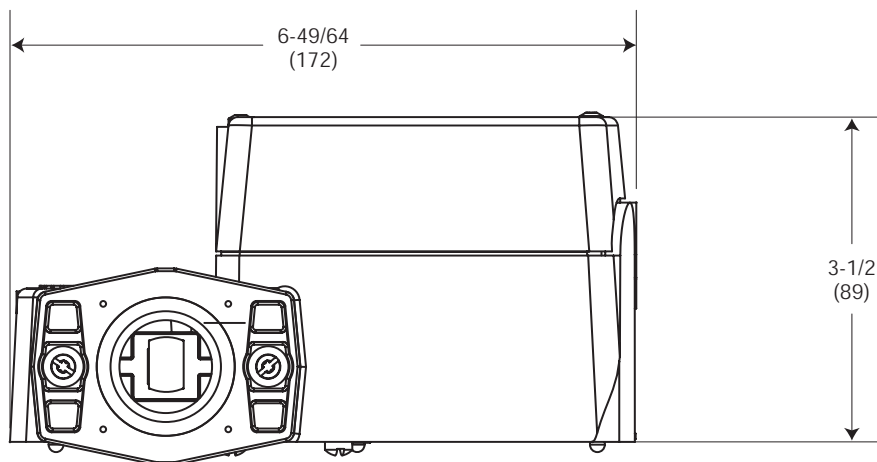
Mx51-710x Spring Return Valve Actuator Dimensions
